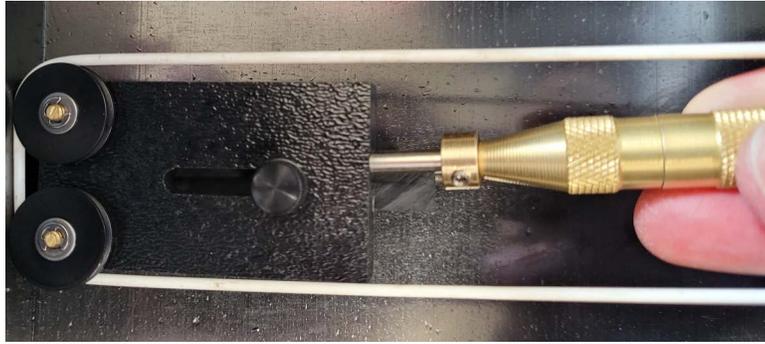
Press String Tensioning Tool Against Base Plate on Adjustable Pulley
